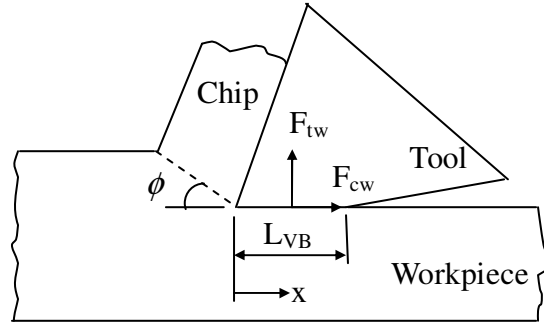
Cutting forces due to tool flank wear in orthogonal cutting model [50]
